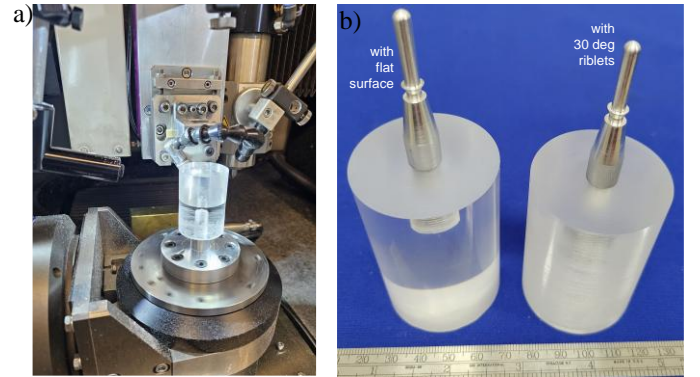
Microfabrication: a) machining setup and b) fabricated drums.
